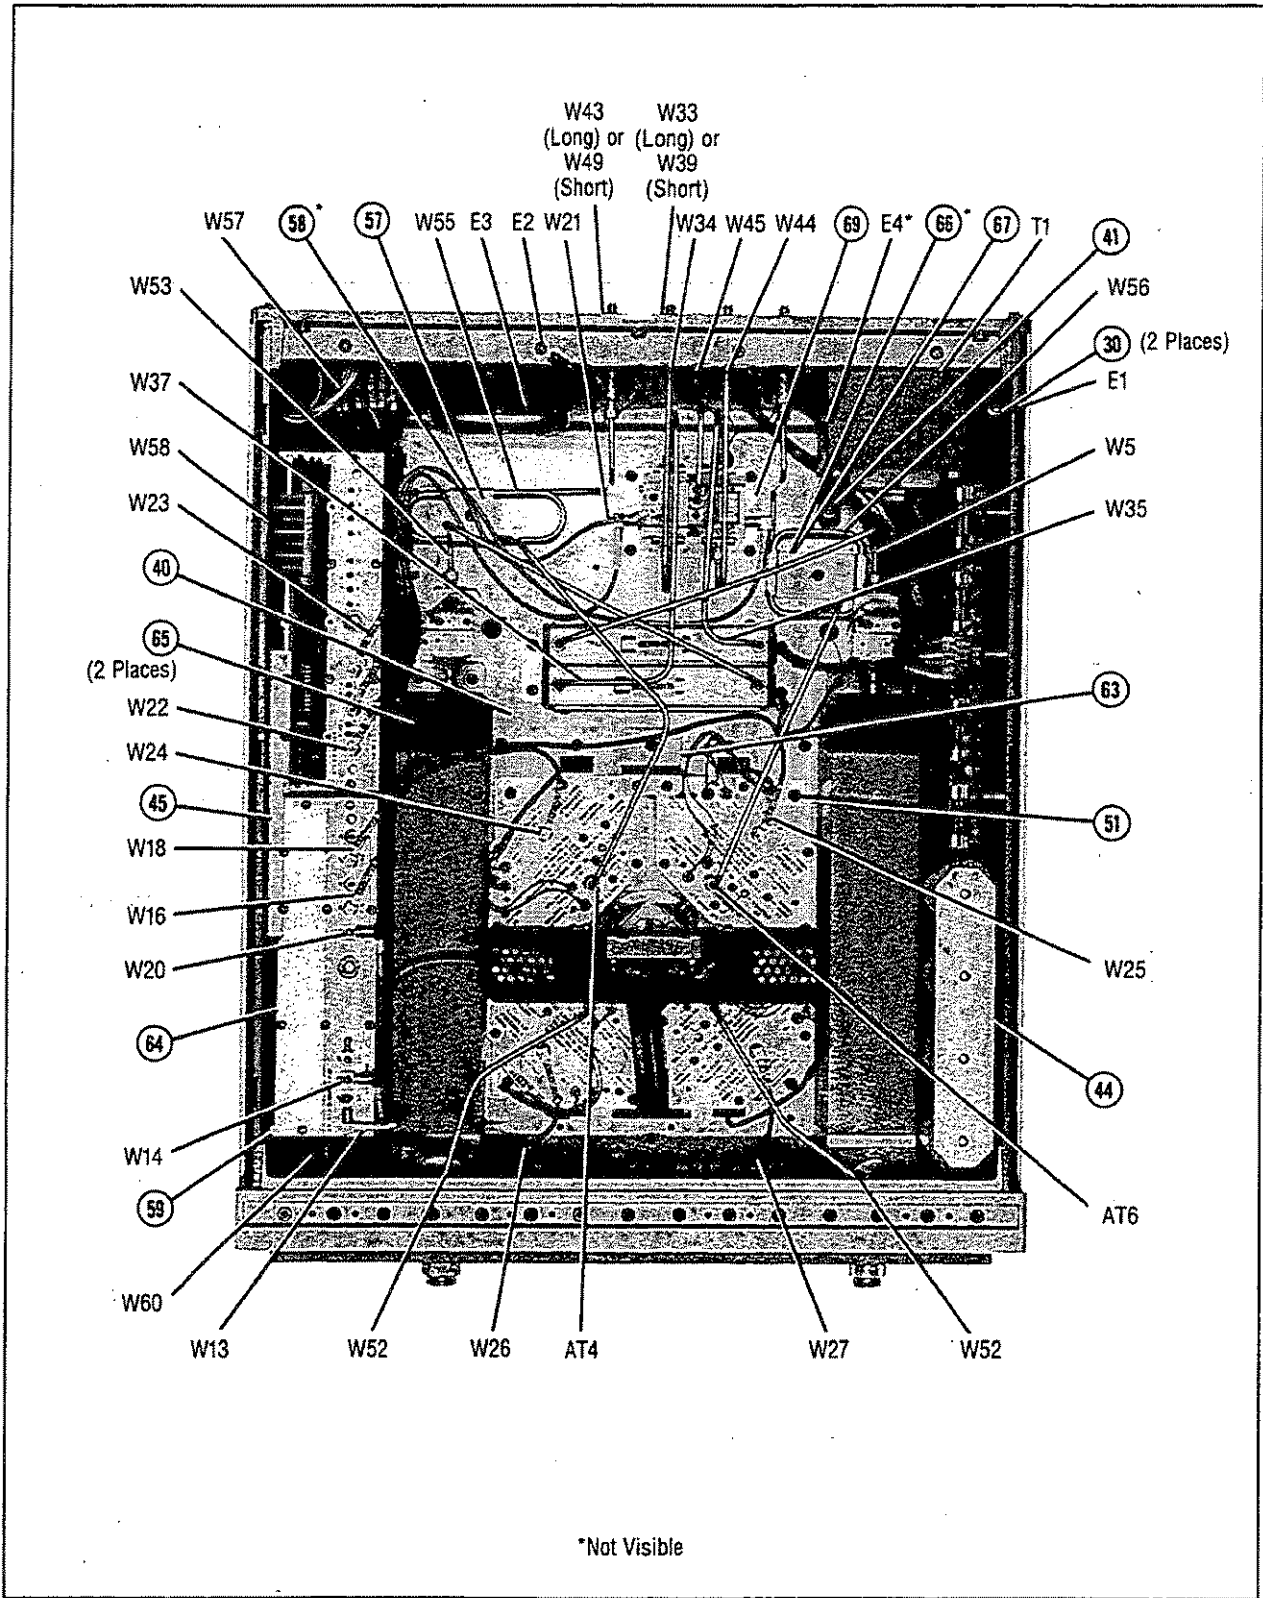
HP 8515A Miscellaneous Mechanical, Chassis, and Electrical Parts (4 of 5)
